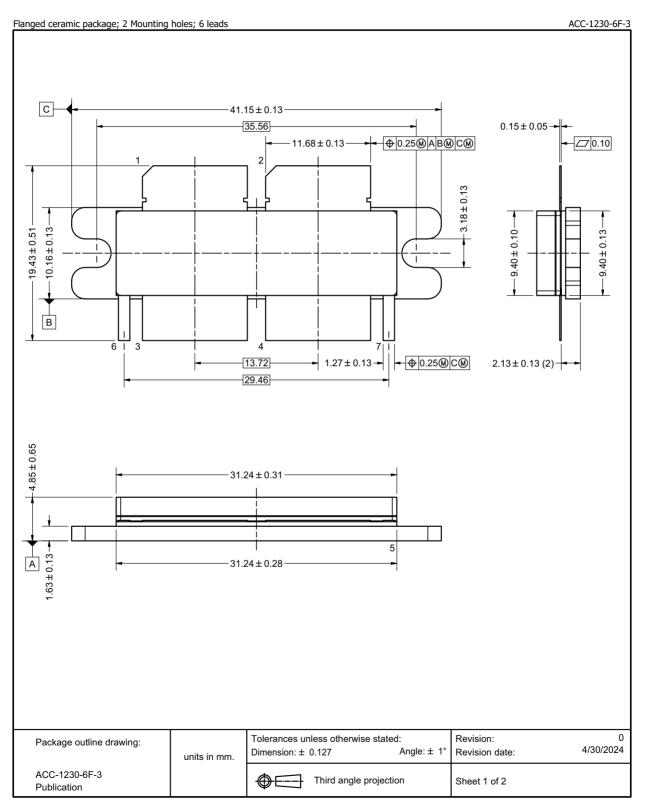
Package outline ACC-1230-6F-3 (sheet 1 of 2)
